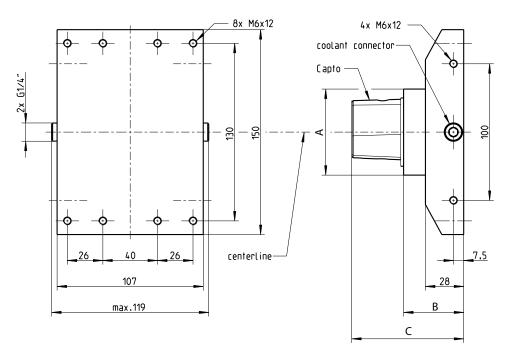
Machine adapter with Capto C... for disk-type turret with Coromant Capto clamping unit, Type 9129AC...
